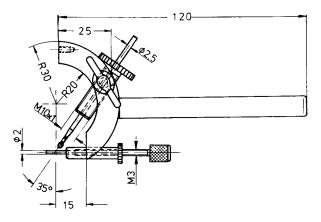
Design for the "stereotactive" guiding device for the dental burr to perform reproducible bone defects leaving a coplanar hot layer of 0.5 mm cartilage and subchondral bone plate. Not shown is the pneumatic mini-drill-turbine. Dimensions in mm.
